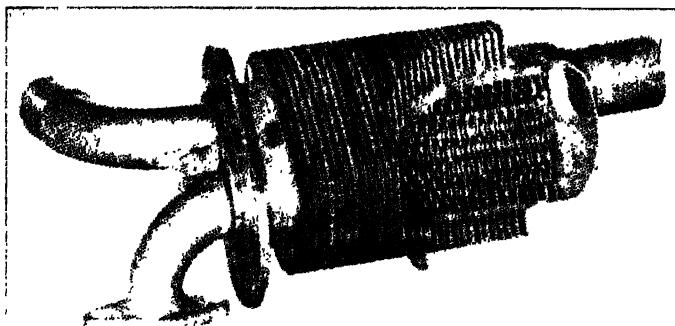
Core (with part cut away) for automobile hot-air heater made of steel stampings and tubing, and copper-brazed.
